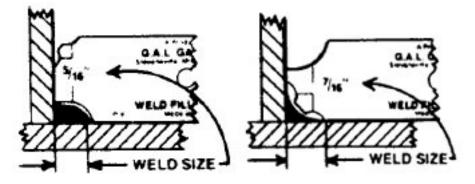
Fillet weld gauge measuring concave fillet weld.
